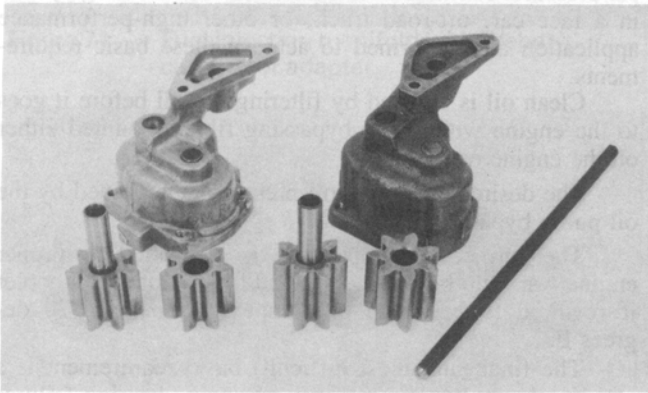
Production V6/60 oil pump (left) has aluminum housing; high-volume pump (right) has cast iron housing and longer gears.
